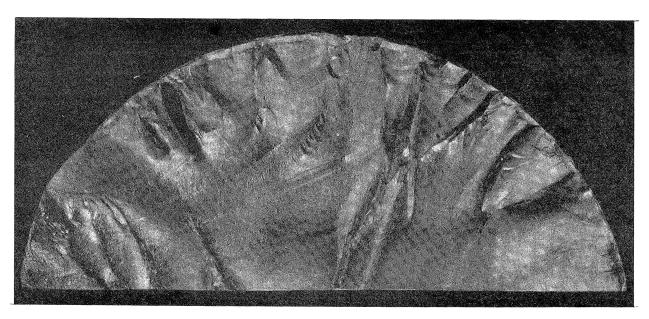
Multiple Fatigue Crack Origins Around the Circumference of a Diesel Engine Crankshaft.
